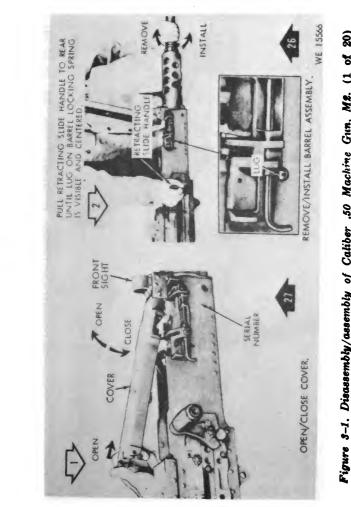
Disassembly/assembly of Caliber .50 Machine Gun, M2. (1 of 20)
